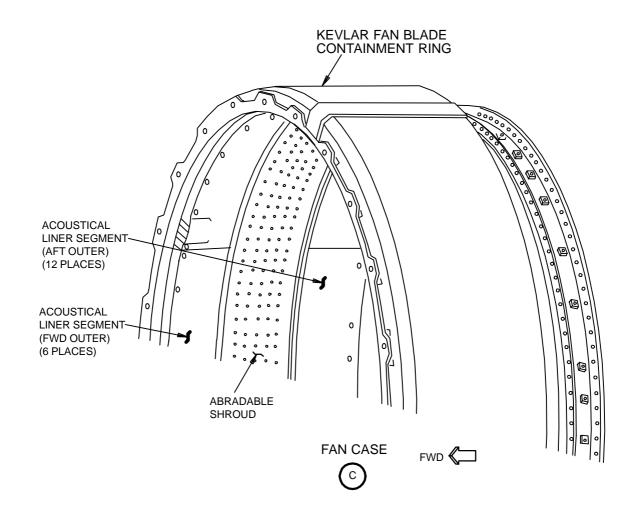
72-00 Engine Component Location Fig. 102 (Sheet 1)
